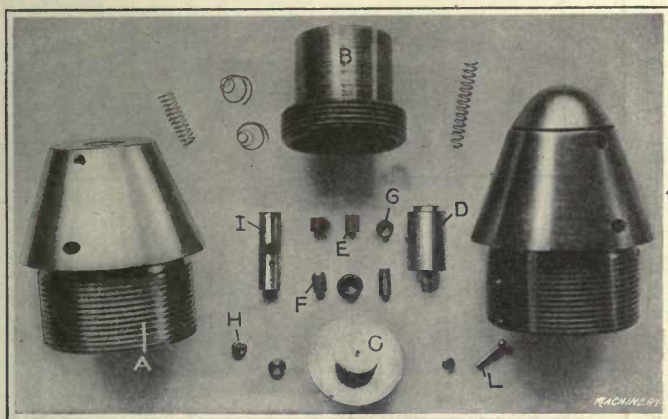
British No. 100 Graze High-explosive Fuse dismantled and assembled
